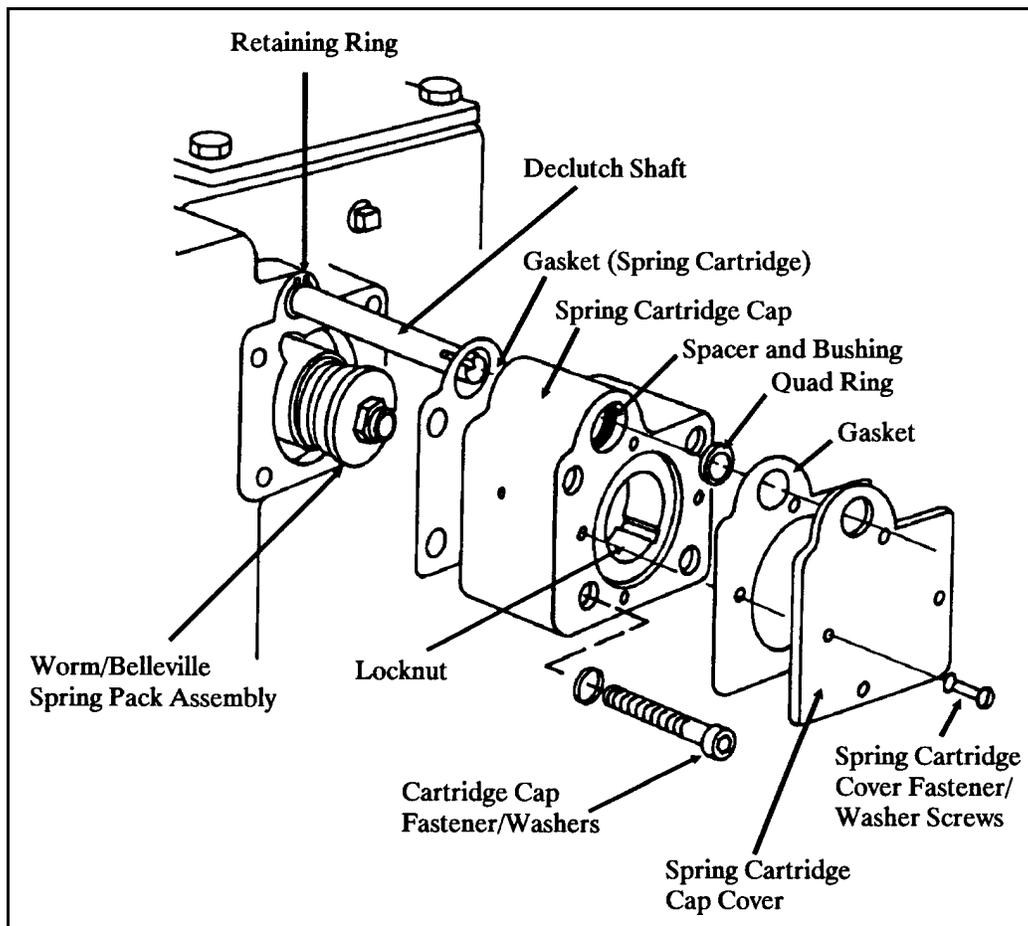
Worm/Belleville Assembly Removal-Old Style
